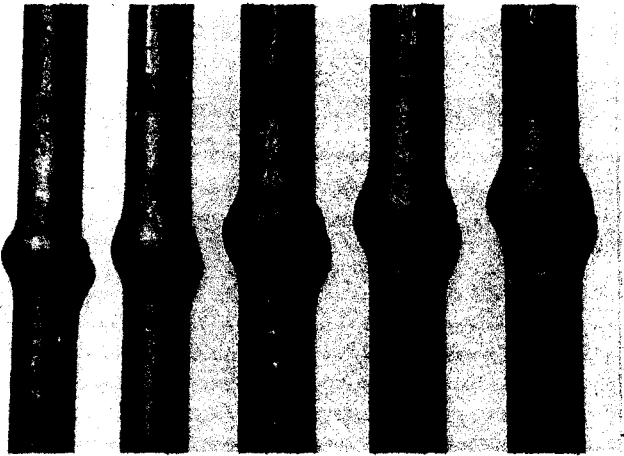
Typical Pressure Gas Welds in 1 in. (25 mm) and 1-1/4 in. (32 mm) Diameter Steel Bars
